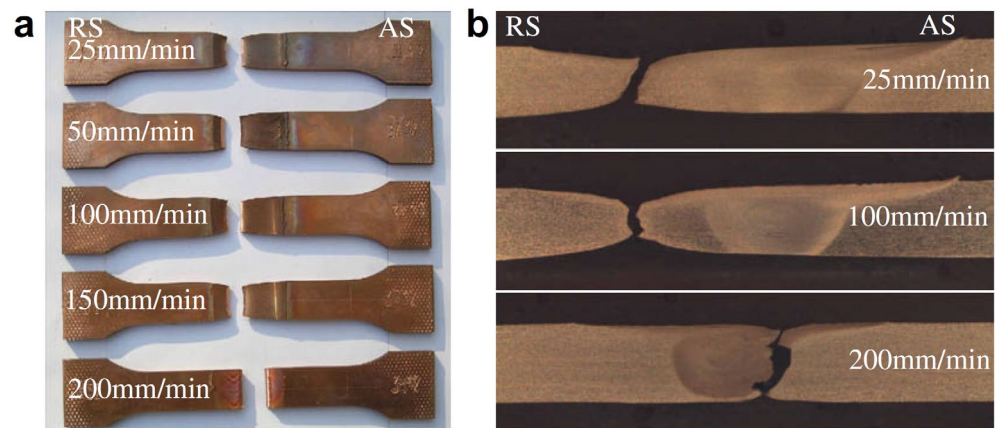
Butt FSW of 3 mm thick comm. pure Cu. Fracture locations: (a) front face and (b) cross-section (ω 600 rpm) [37].
